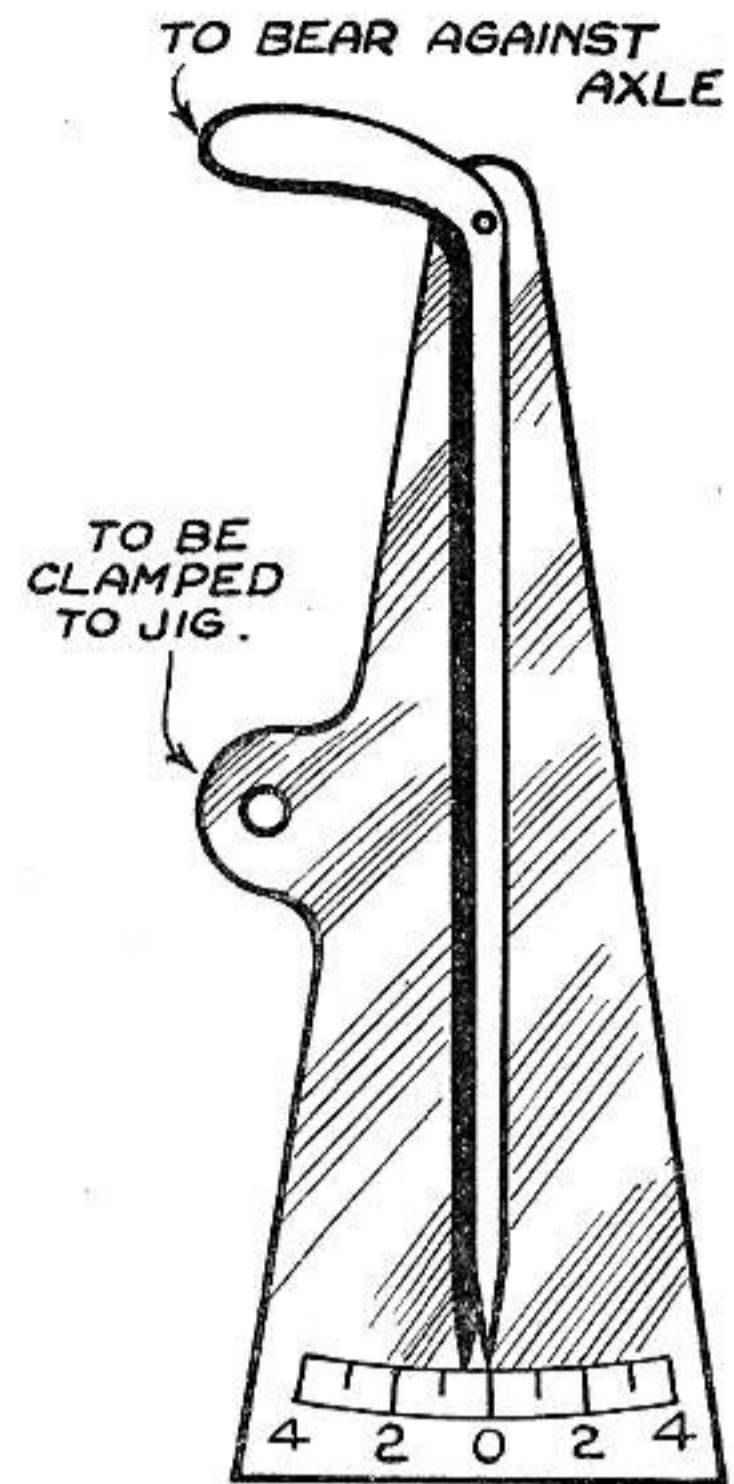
DETAIL OF INDICATOR FOR TESTING THE FLYWHEEL ASSEMBLY.
